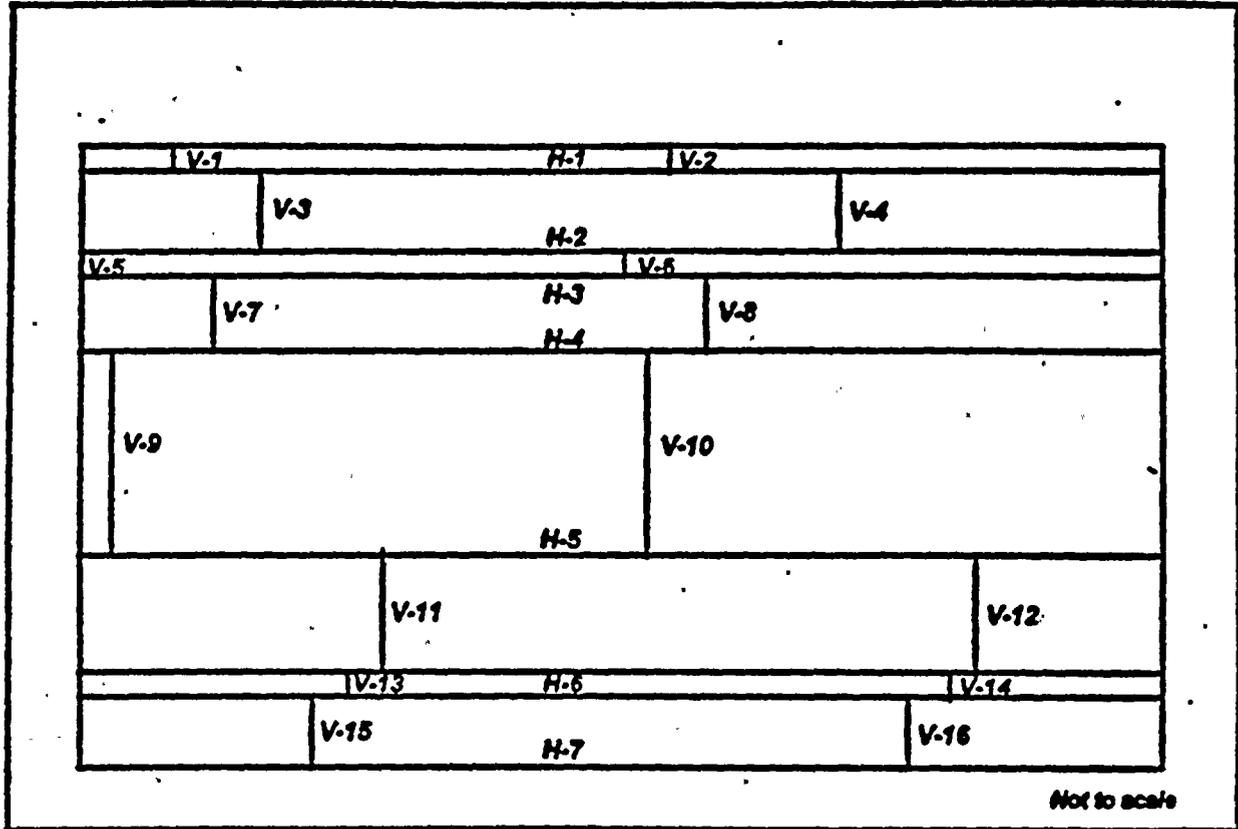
NMP1 Shroud Weld Locations
